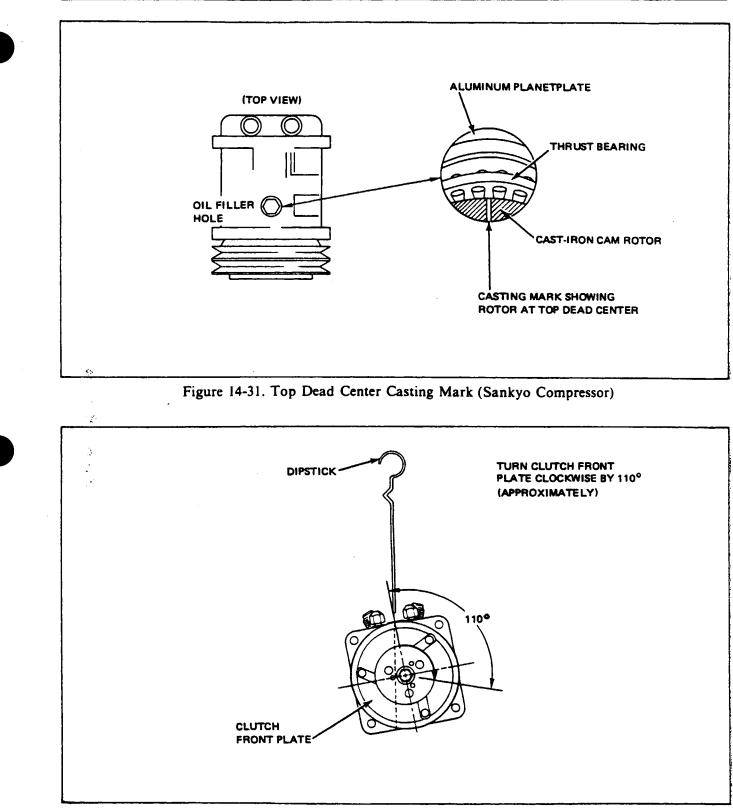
Rotation of Clutch Front Plate (Sankyo Compressor Oil Check)
